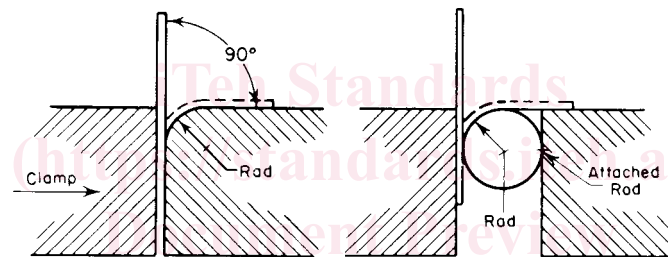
Methods for Clamping Specimen to Radius for Bend Test
